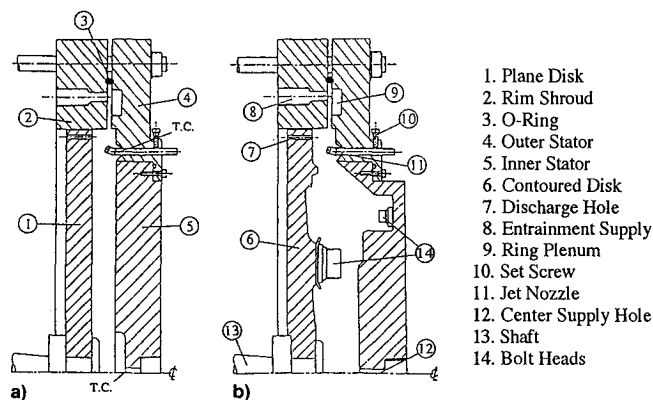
Disk and stator assembly cross section: a) plane smooth and b) flight.
